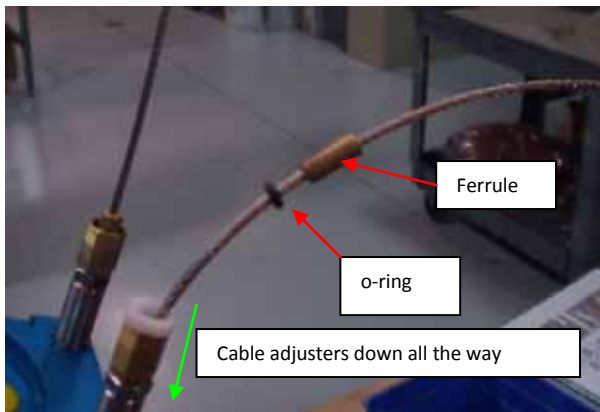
Ferrule Installation Front and Rear Spring Cable
